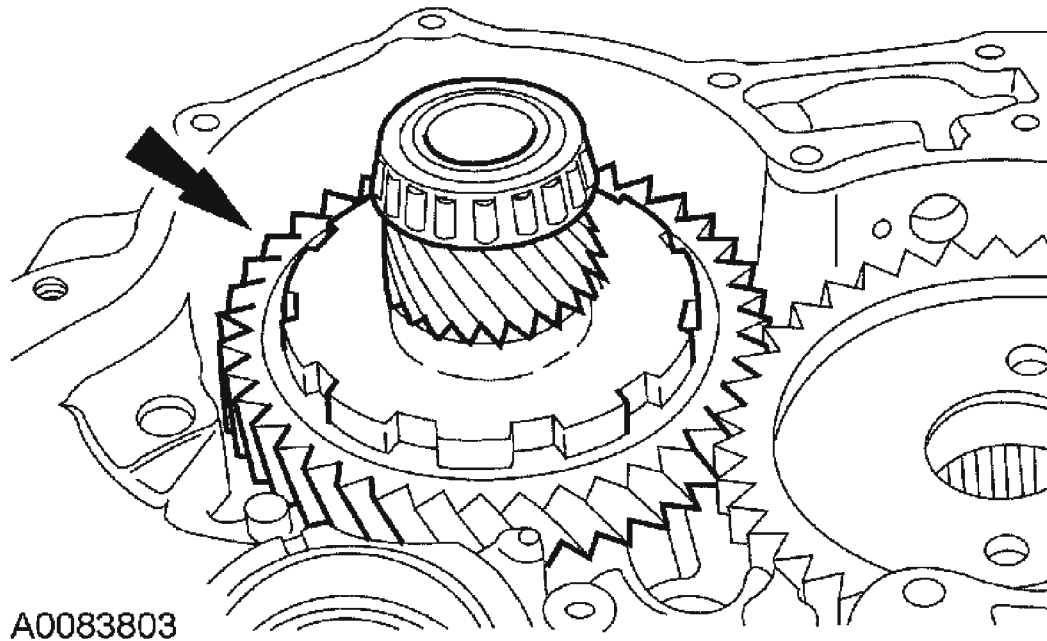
Positioning Transfer Shaft Gears In Transaxle Case
